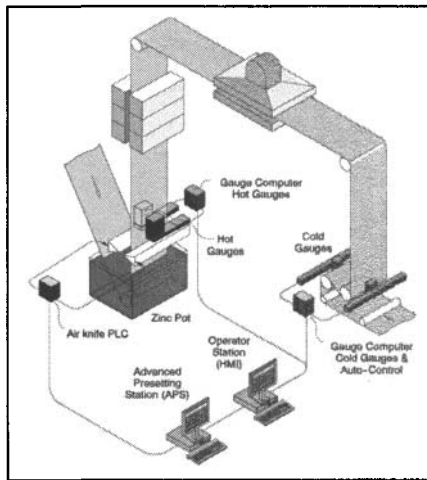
Hot Dip Galvanizing (HDG) Line with Cold Gauge and Hot Gauge Measurements
